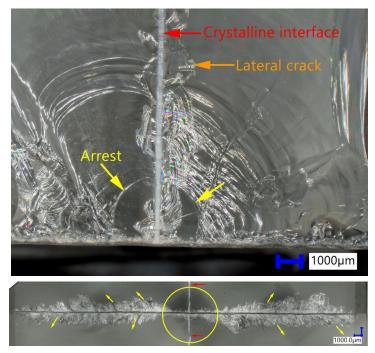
Crack front (top) and bottom surface (bottom) of a fused "Borosilicate 970° C" specimen. The perpendicular to the toolbit crystalline interface is separating the component in two parts.
